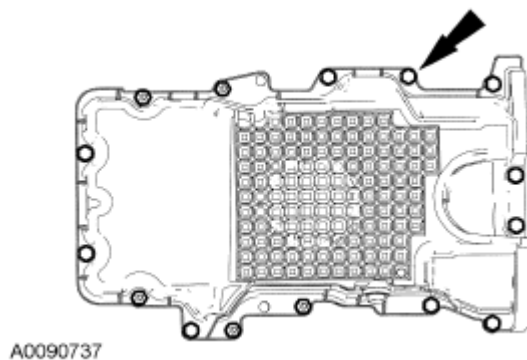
Locating Oil Pan Gasket Bolts & Stud Bolts
